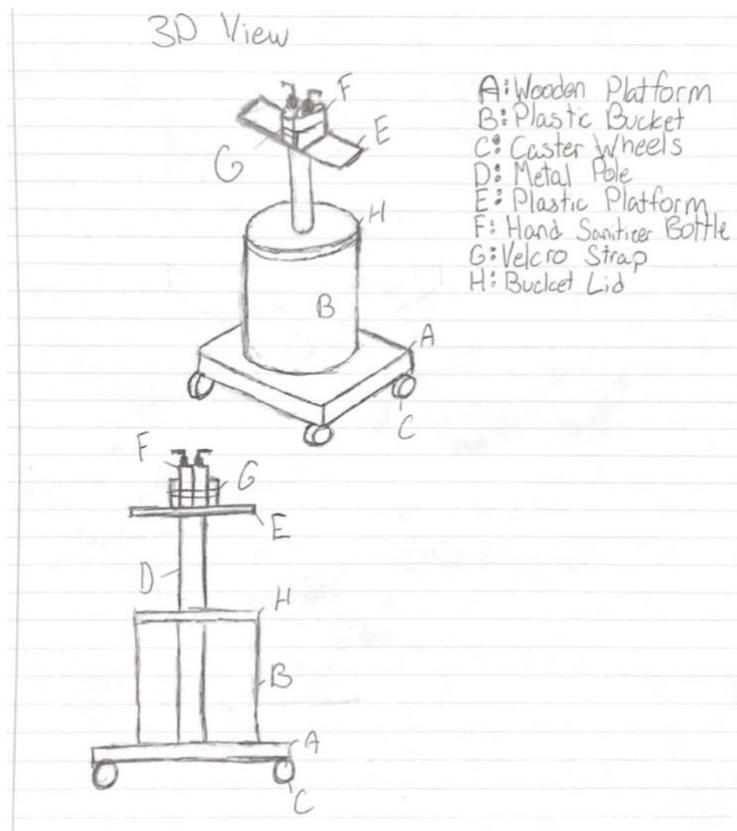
Initial Sketch of Double Pump (Drawing by Joseph Hollingsworth).
